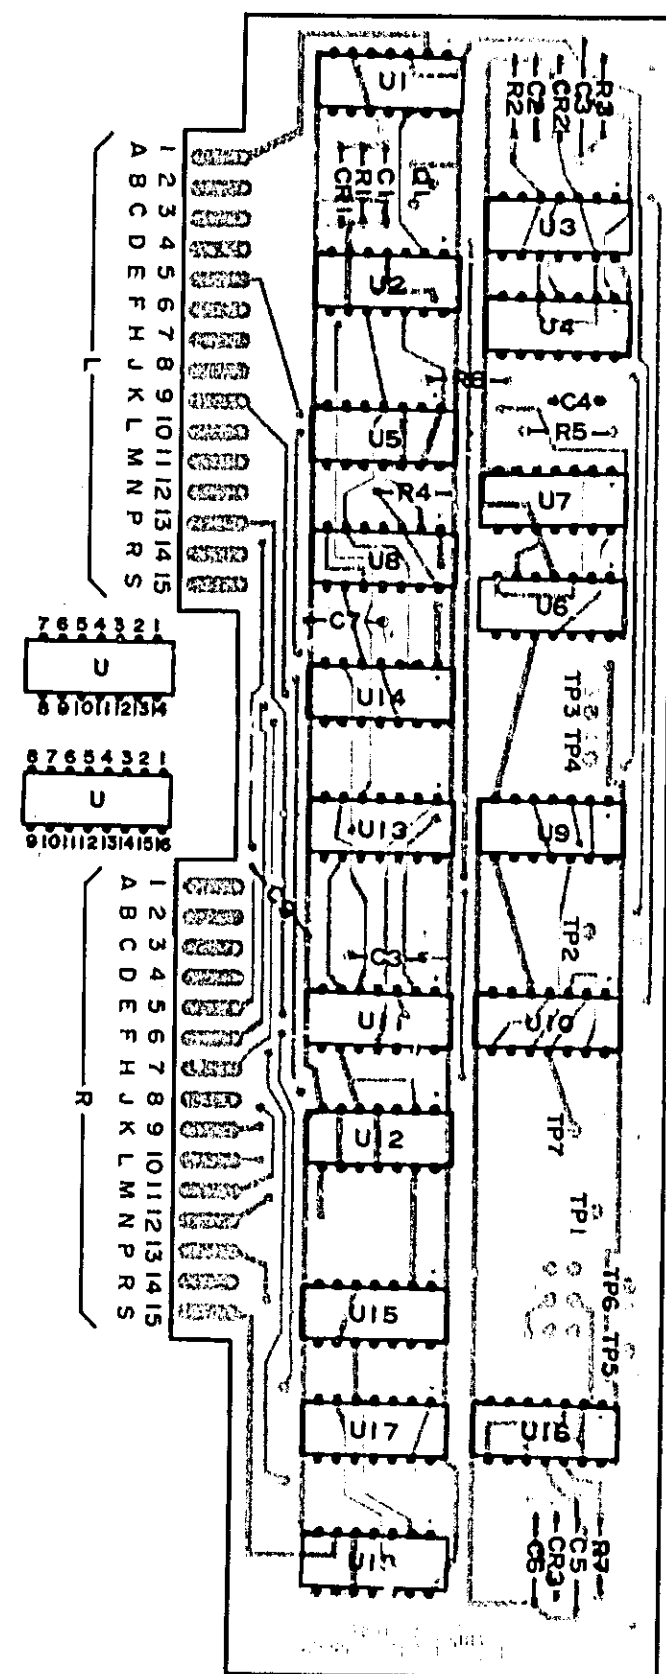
A14 Gate &amp; Transfer Control Board Assembly Component Locations.
